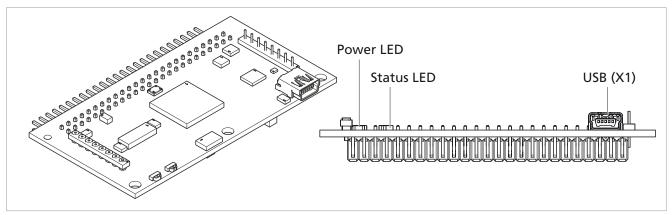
ISO view (left) and front elevation (right) of the standard circuit board
